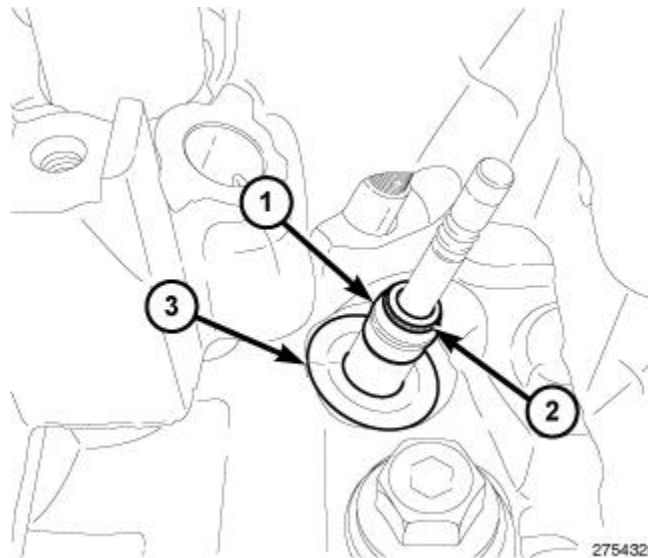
Spring Seat, Valve Guide Seal & Garter Spring
